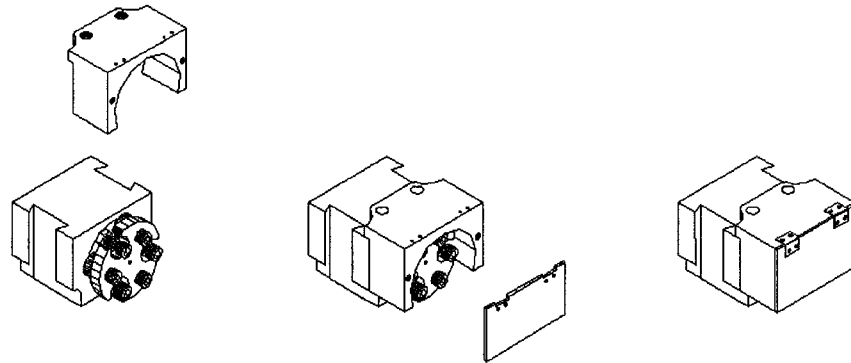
Assembly of the sensor housing unit onto the tool post structure
